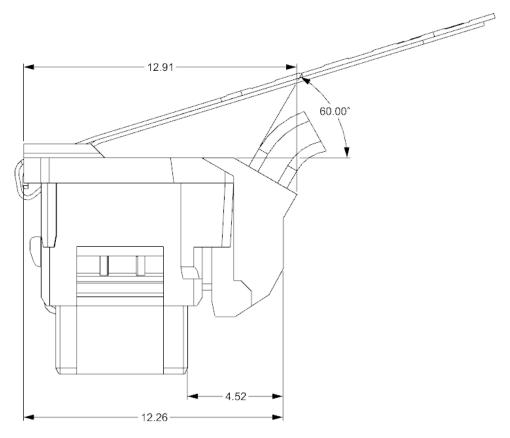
Profile View of Free-Side Connector with 60° Angle Cable Exit & Pull Tab
